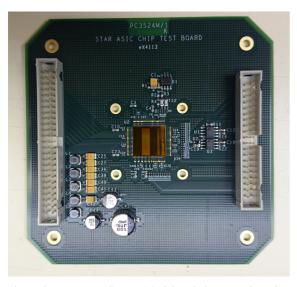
Prototype STAR ASIC bonded to a carrier PCB.
